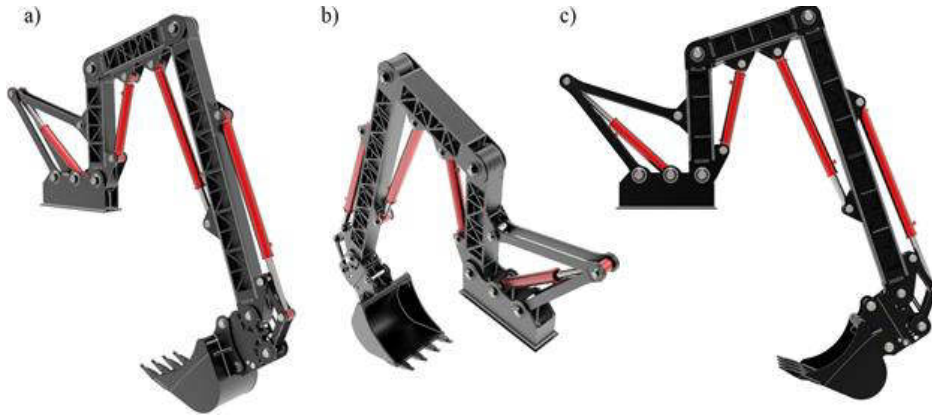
Visualization of main assembly of designed attachments module in transporting position, where: a) front isometric view; b) rear isometric view; c) side view.
